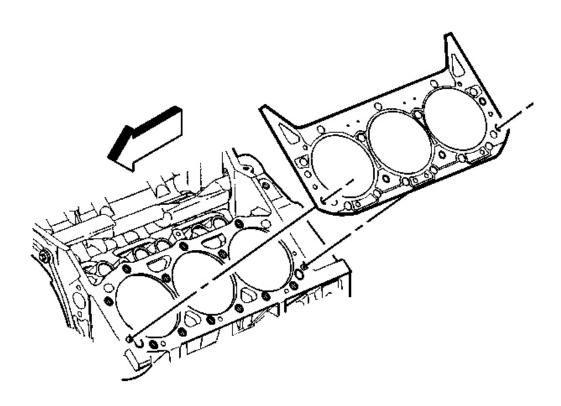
View Of Cylinder Head Gasket And Alignment Pins - Left Courtesy of GENERAL MOTORS CORP.
